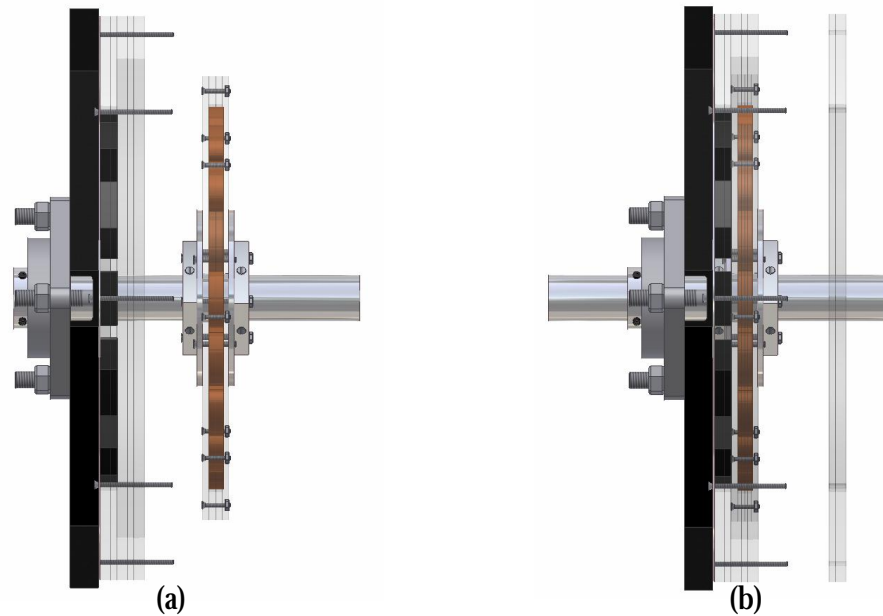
Fastened Stator and Rotor End. Once the stator is fastened to the pipe using No. 12-24 screws (a), the rotor end should be set in place using setscrews in the bearings. The rotor end should be positioned so that there is less than 2.54 mm (0.1 in.) between the acrylic supports on the rotor and the acrylic cover of the stator. Once this is done, the acrylic supports for the second rotor end should be placed on the rotor (b).
